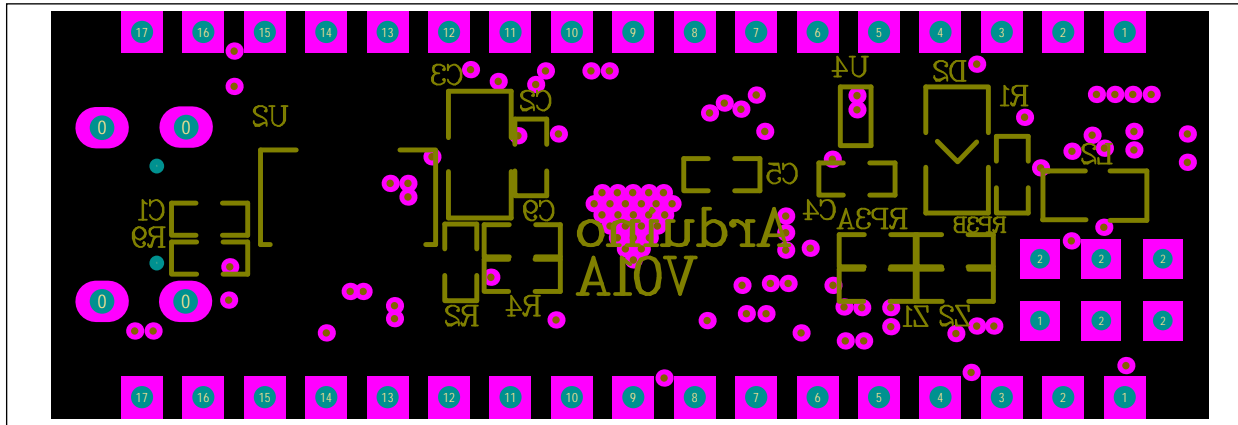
Arduino Board Component Placement Guide - Bottom Layer
